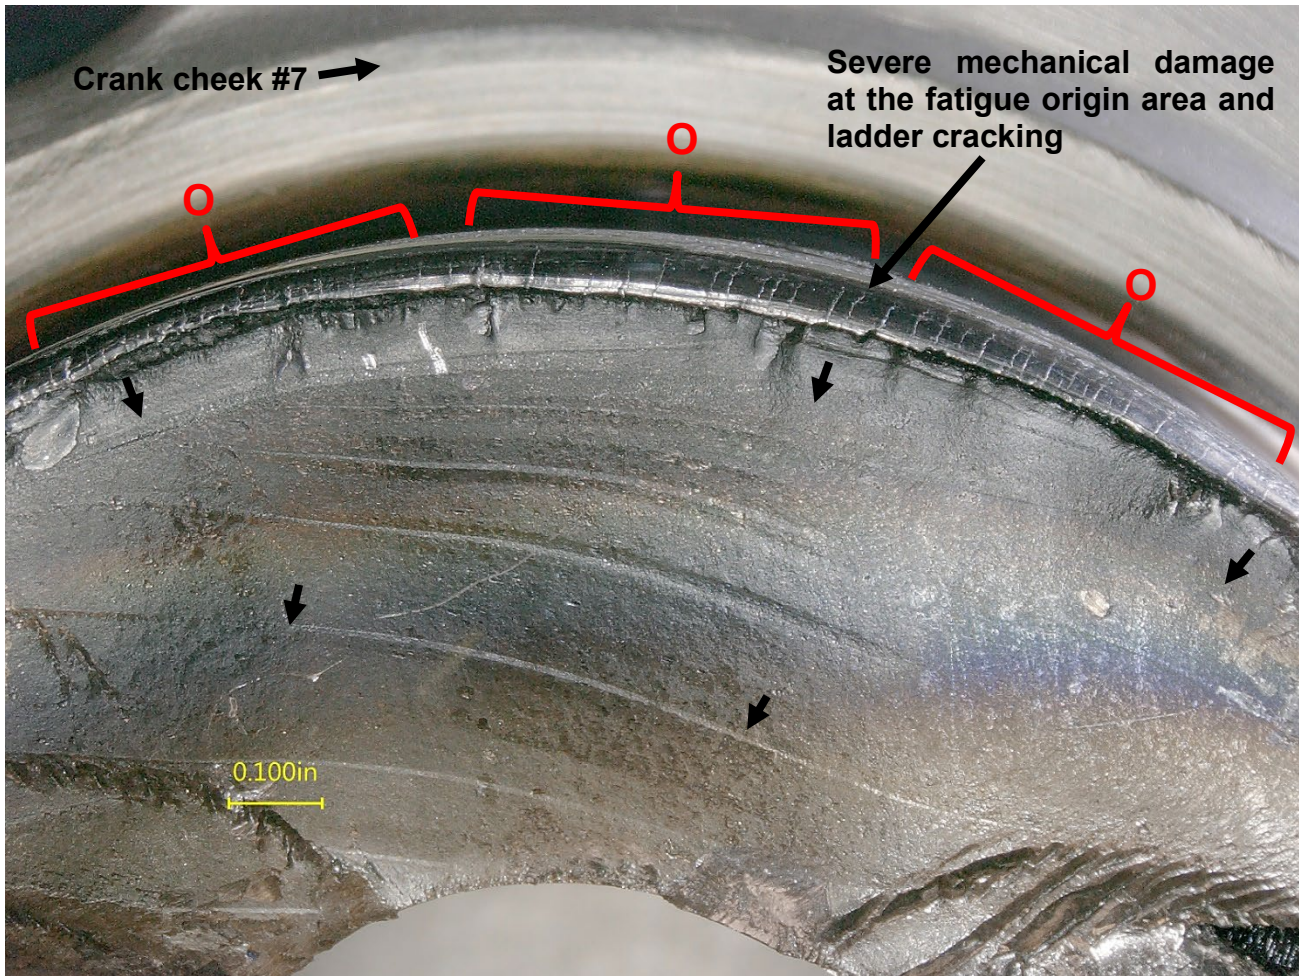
Close-up photograph of the aft fracture face of main journal #3 showing fatigue crack origin area indicated by brackets "O" and general direction of fatigue crack propagation. The origin of the fatigue crack exhibited evidence of severe mechanical damage and multiple ladder cracks.
